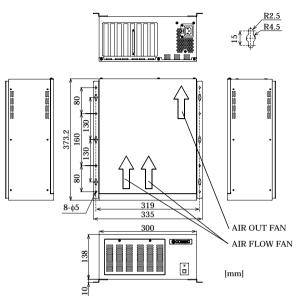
Outside Dimensions < ECH(PCI)BE-F7A, Horizontally placed >
